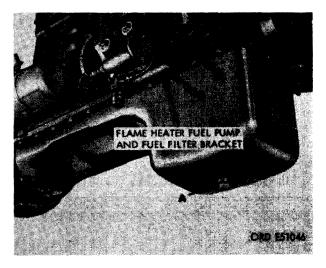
DRAINING ENGINE OIL AND DISCONNECTING OR CONNECTING FLAME HEATER FUEL PUMP AND FUEL FILTER BRACKET.
